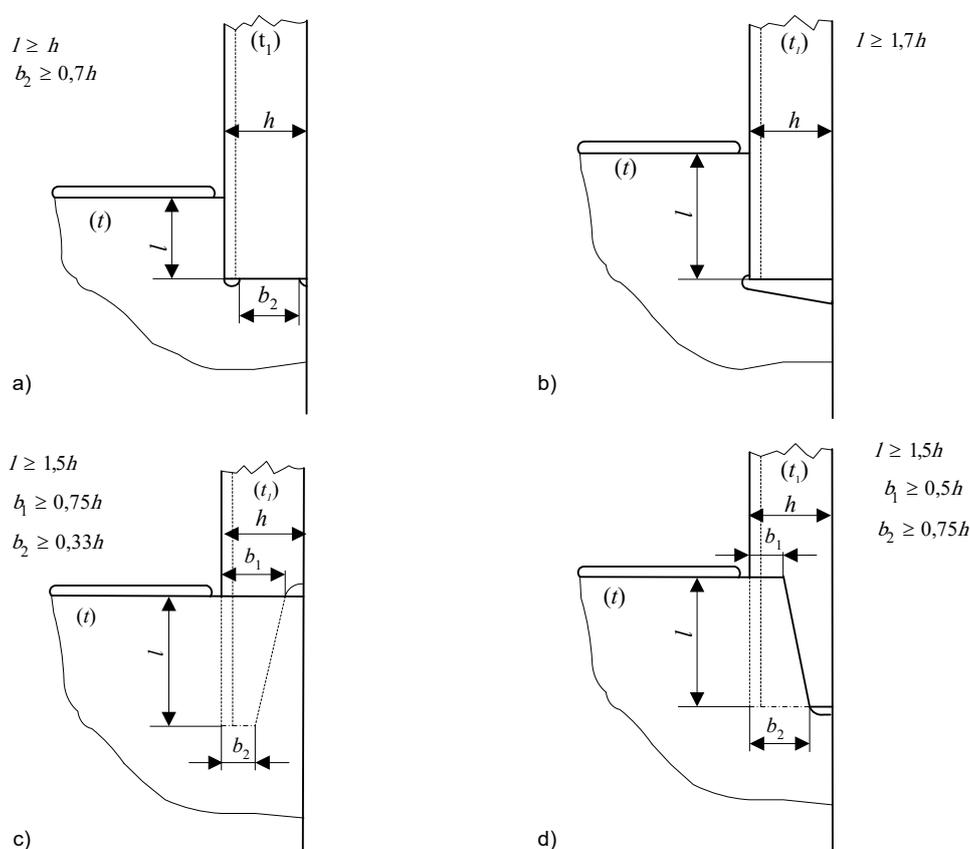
Required design patterns for connection of stiffener ends to girders or brackets
